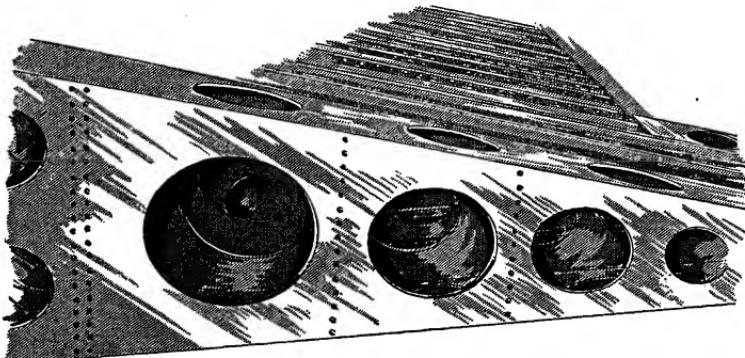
Aluminum-alloy wing-rib construction used on Douglas B-19 bomber which has a wing spread of 210 ft.
